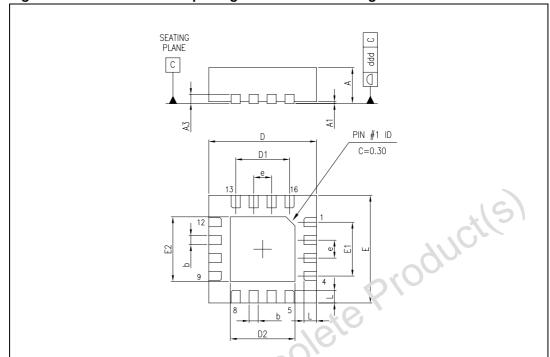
QFN16 3 x 3 mm package mechanical drawing
